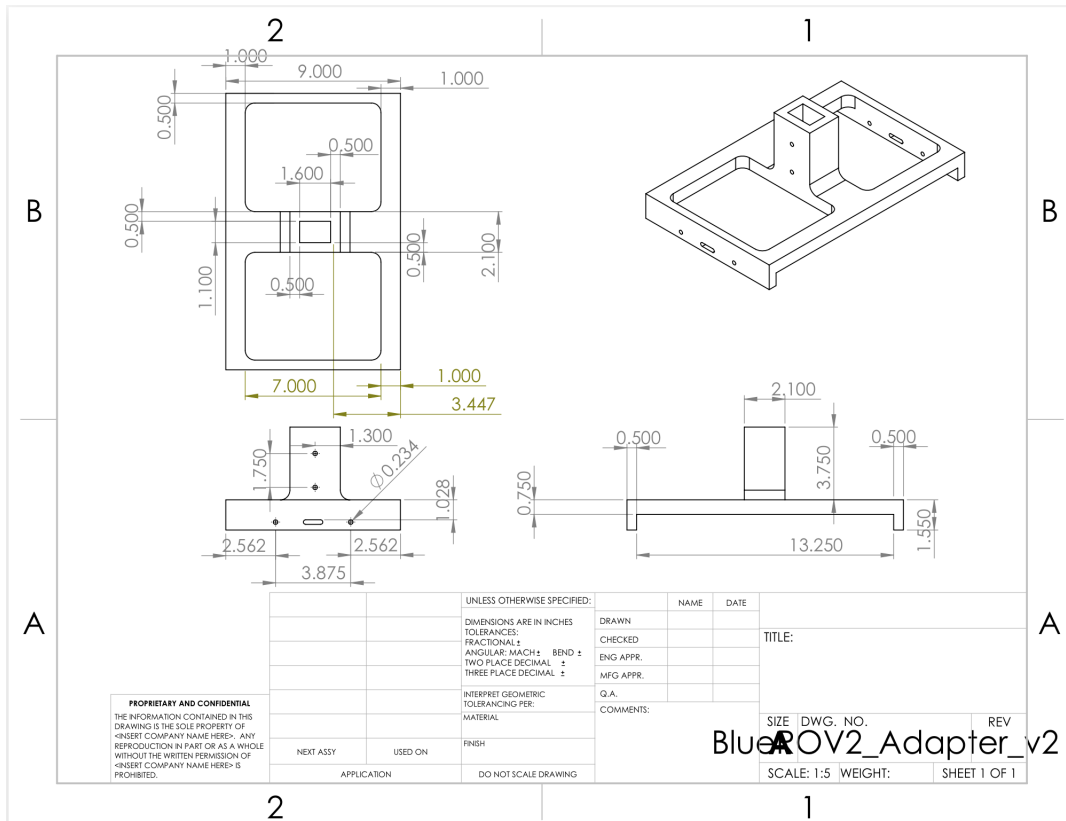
Engineering Drawing of Adapter. Dimensions shown in inches.
